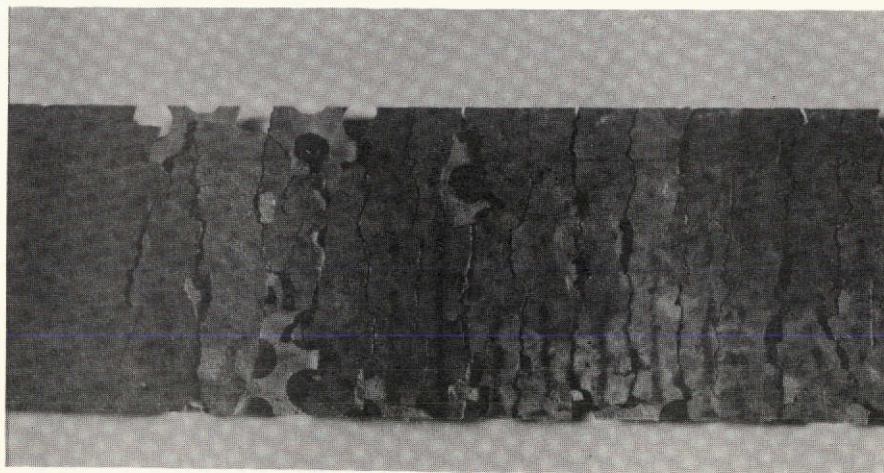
Supplier B Positive Plate After Bend Testing (TRW Photo No. 104825-73)
